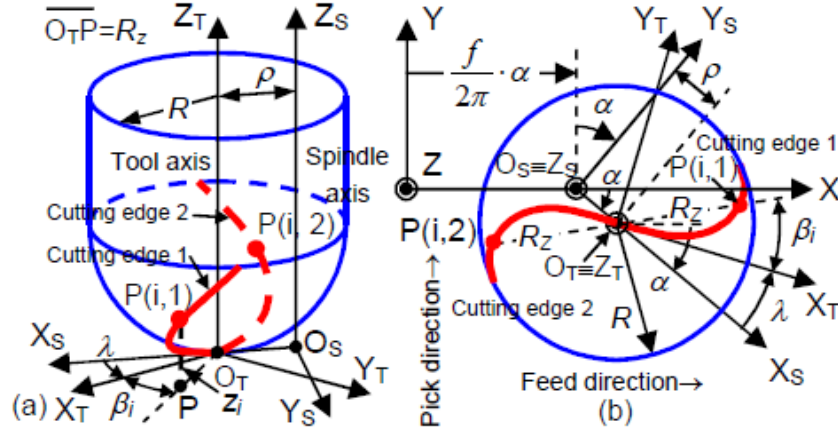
Modeling ball end milling tool cutting edge path with vibrational effect [93]
